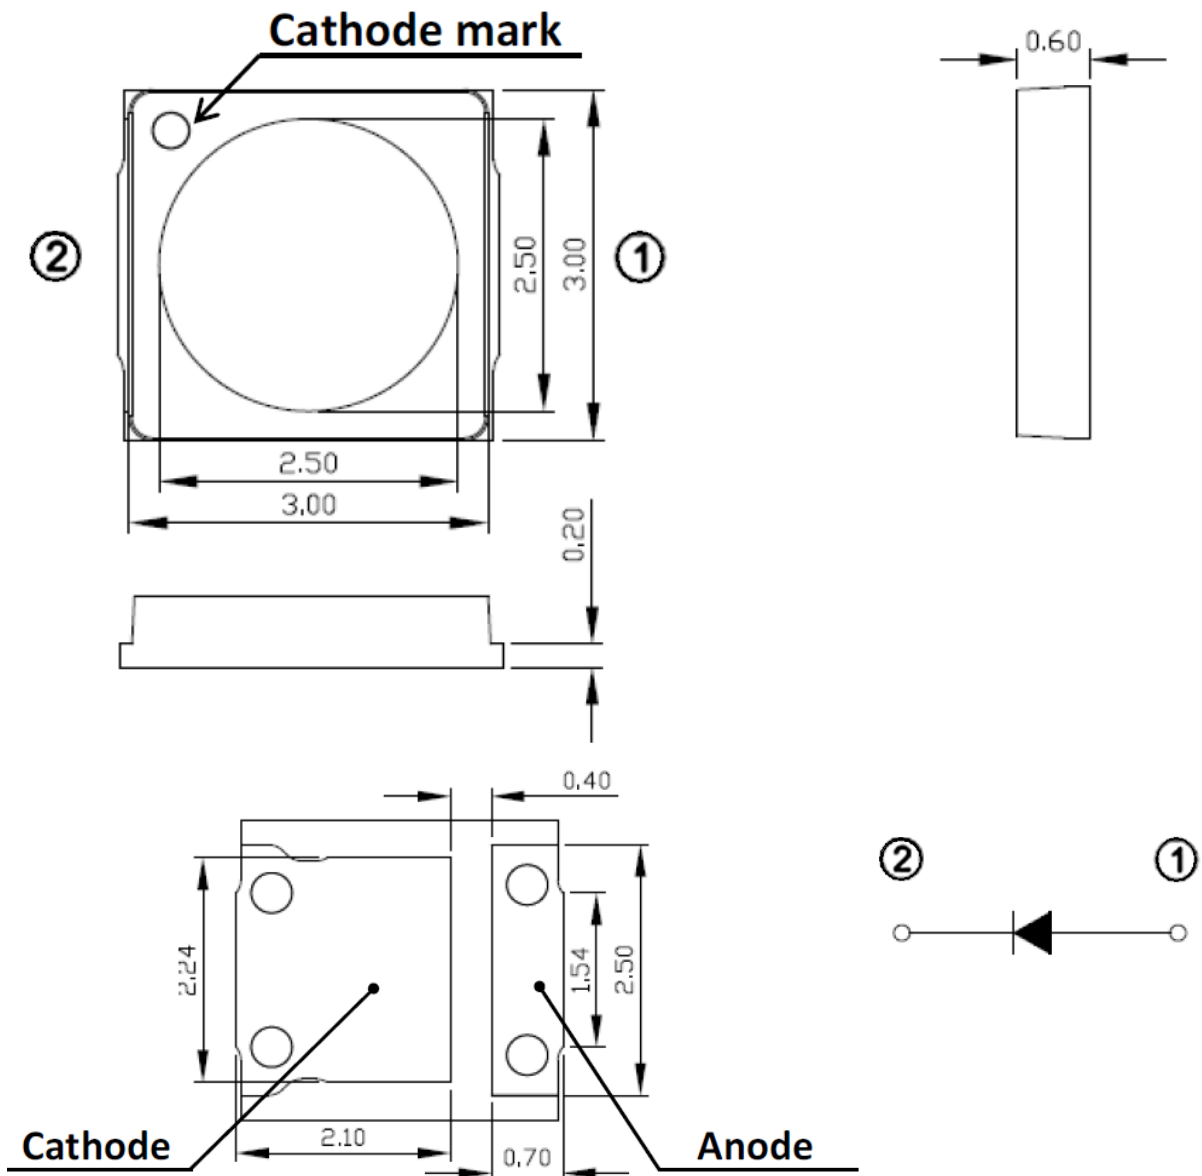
Mechanical drawings of the 3030 package (unit is in mm with  $\pm 0.1$  mm tolerance)
